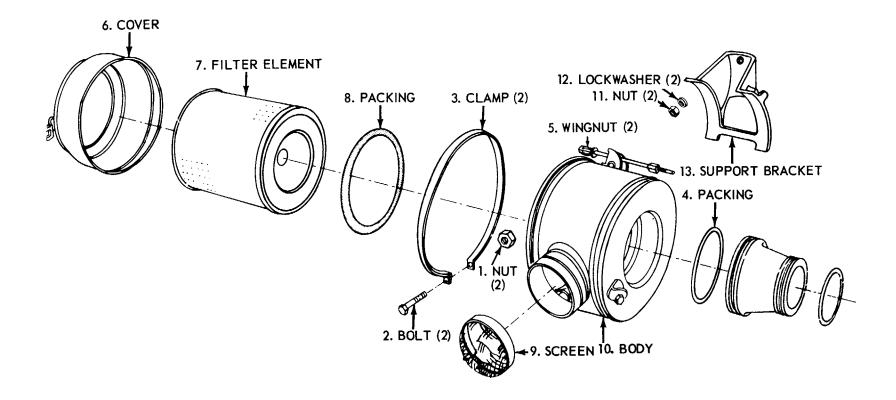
Air cleaner, disassembly and reassembly (on crane models 855BGs with engine model 687C-18-ES).
